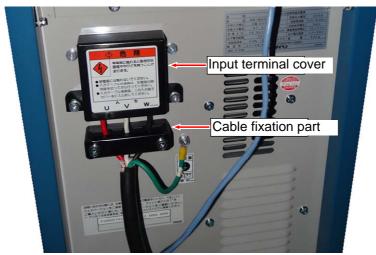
(c) Connection of welding power supply (3/3)
